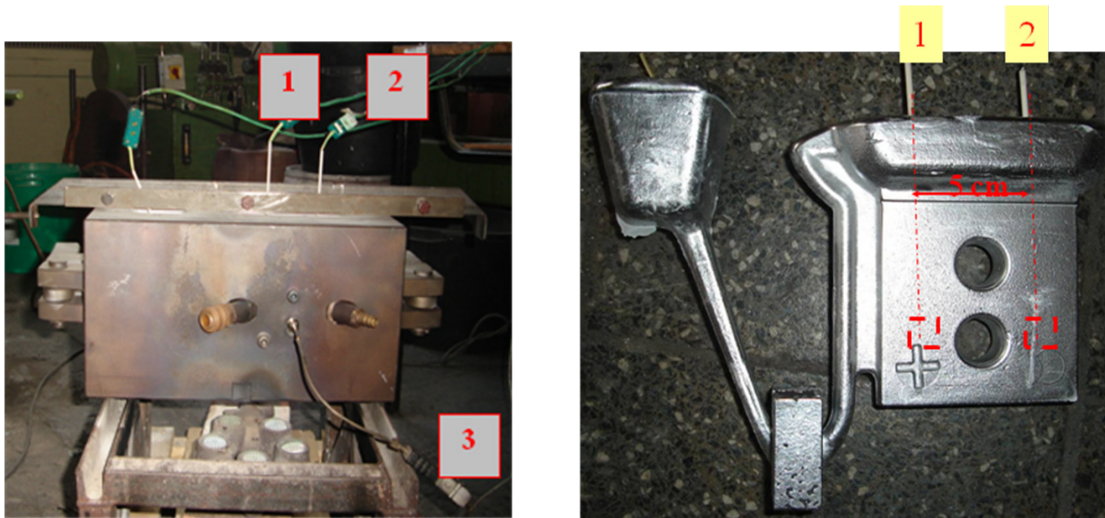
Position of thermocouples in mold cavity and in casting
